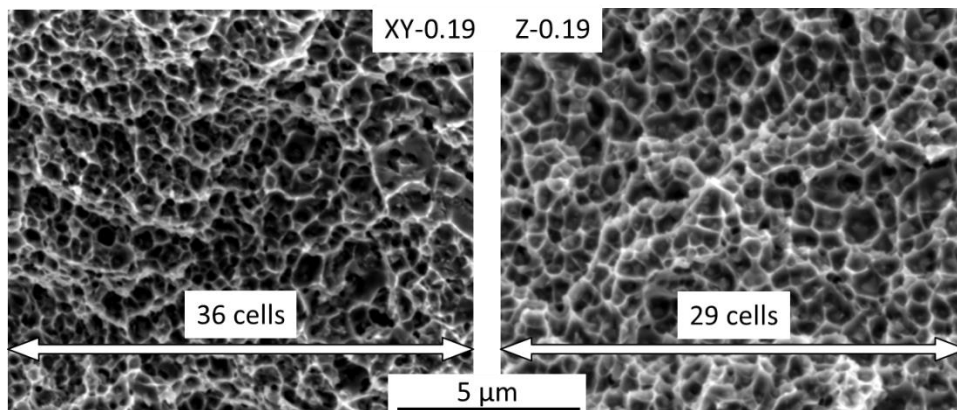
Microvoids on the fracture surface of printed samples.
